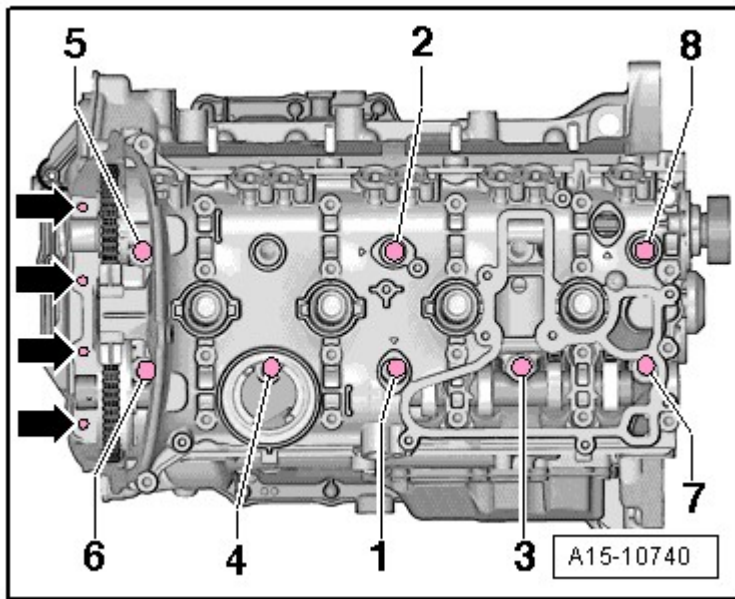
Identifying Cylinder Head Bolts Tightening Sequence
